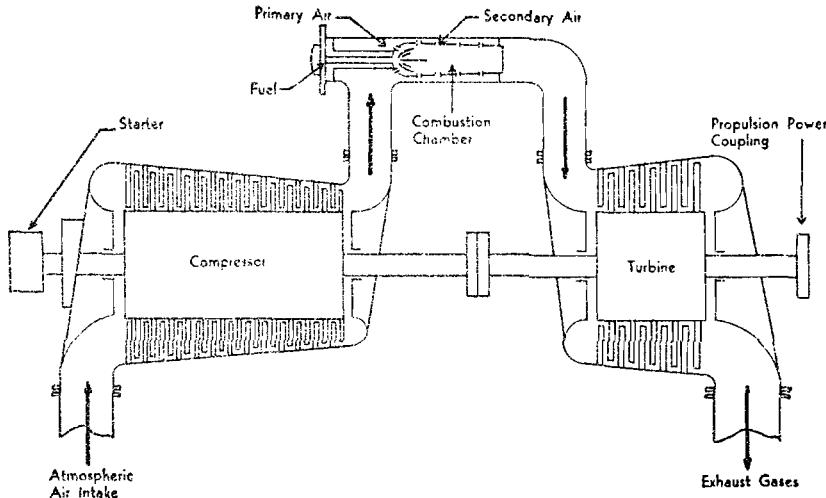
Component parts of a simple open cycle (constant-pressure combustion) gas turbine.
